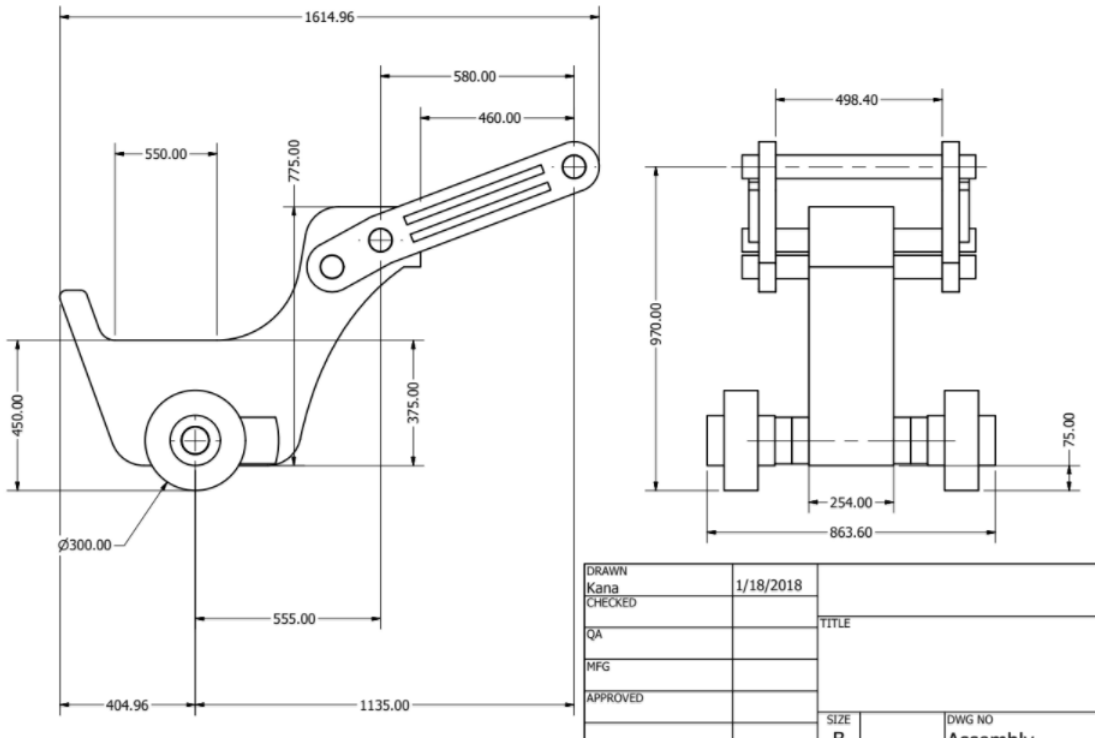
“Raging Duck Cart” Measurements for CNC Machine
